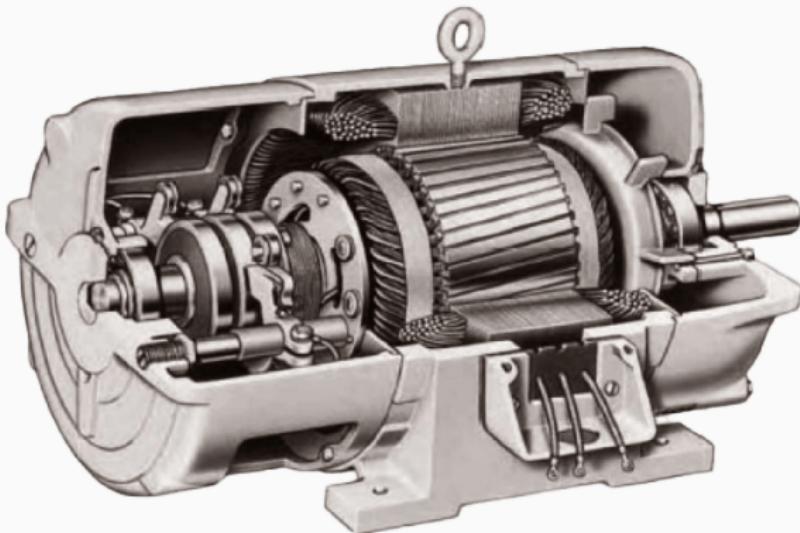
A sliced up view of a wound rotor induction motor (WRIM).
